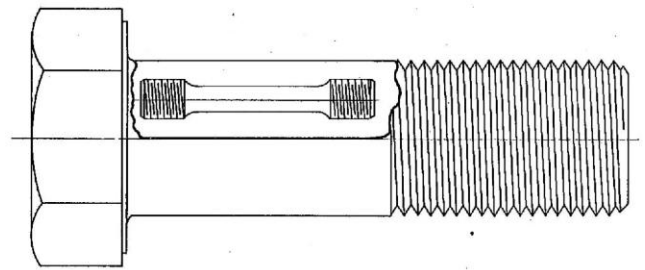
LOCATION OF STANDARD ROUND 2 IN. GAGE LENGTH TENSILE TEST SPECIMEN WHEN TURNED FROM LARGE SIZE BOLTS OR SCREWS
